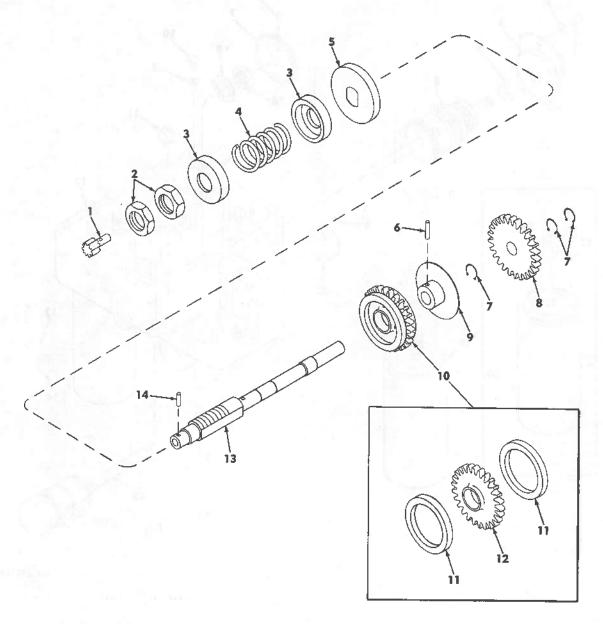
ORIVE, TUNING, MAGNETRON /10185496/-PARTIAL EXPLODED VIEW
